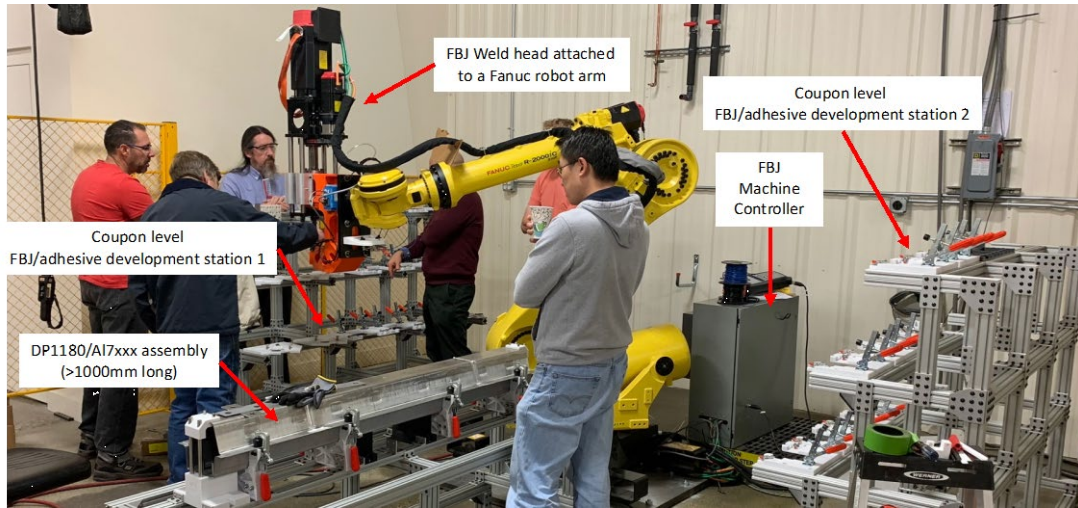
New FBJ welding head on Fanuc robot and work cell fixtures for coupons and prototype parts at Mazak MegaStir. Source: ORNL.
